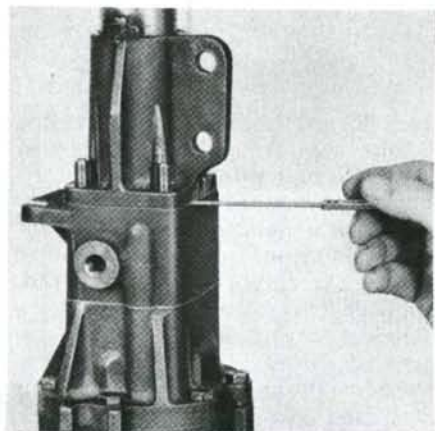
Make sure steering column is bottomed in steering shaft splines, then measure clearance for upper shim pack as shown. Install shims equal to measured clearance PLUS 0.005 inch (0.125 mm).
